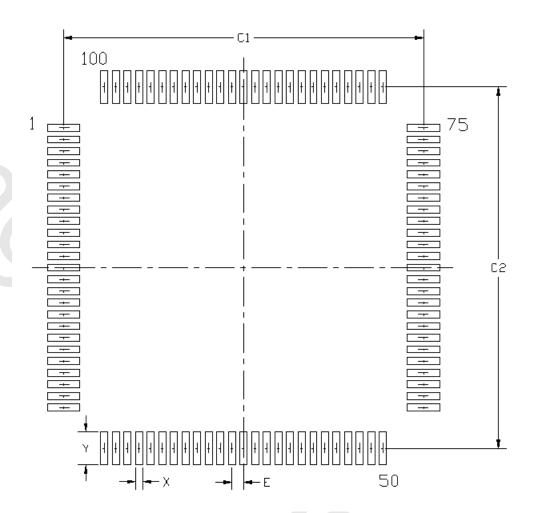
TQFP100 PCB Land Pattern Drawing
